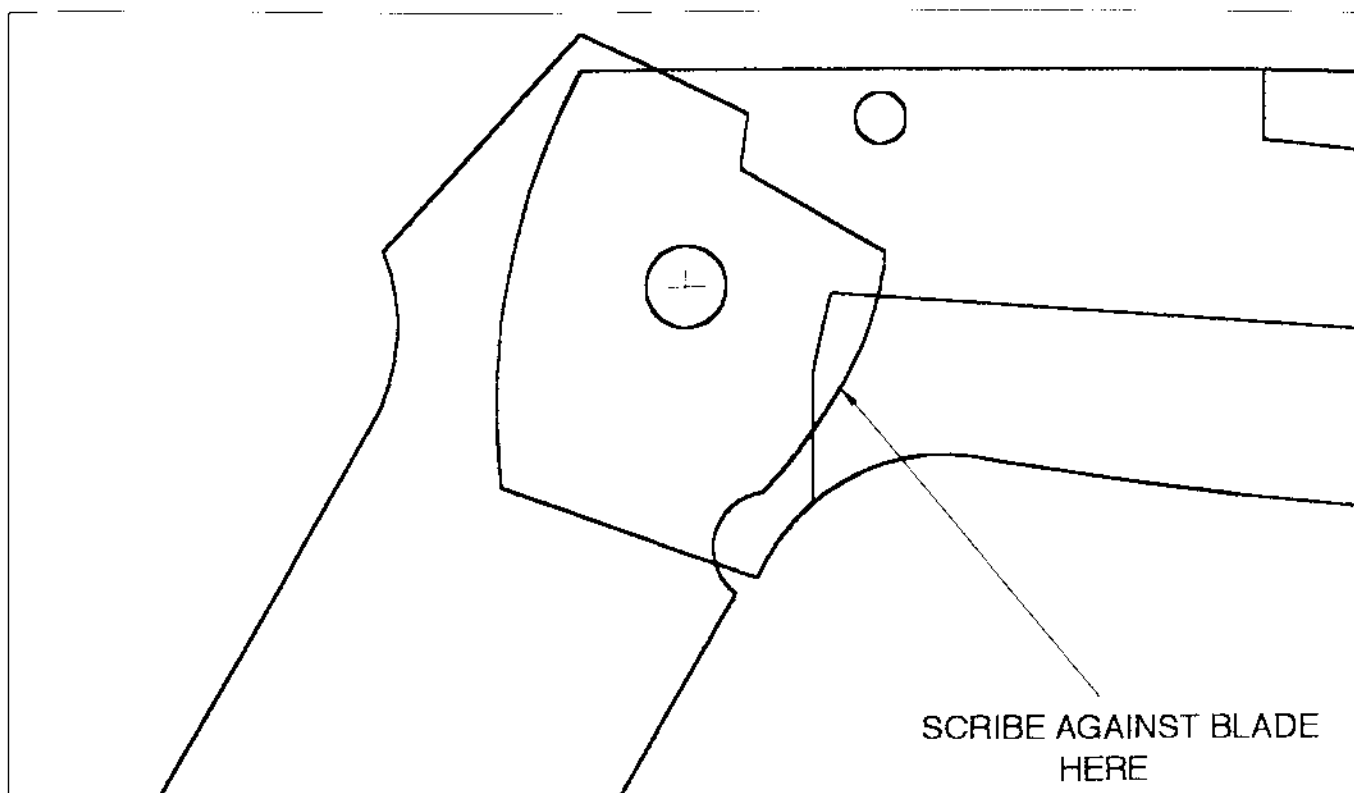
The location of the ball bearing detent is determined by the dimensions of the lower radius of the blade's tang.
